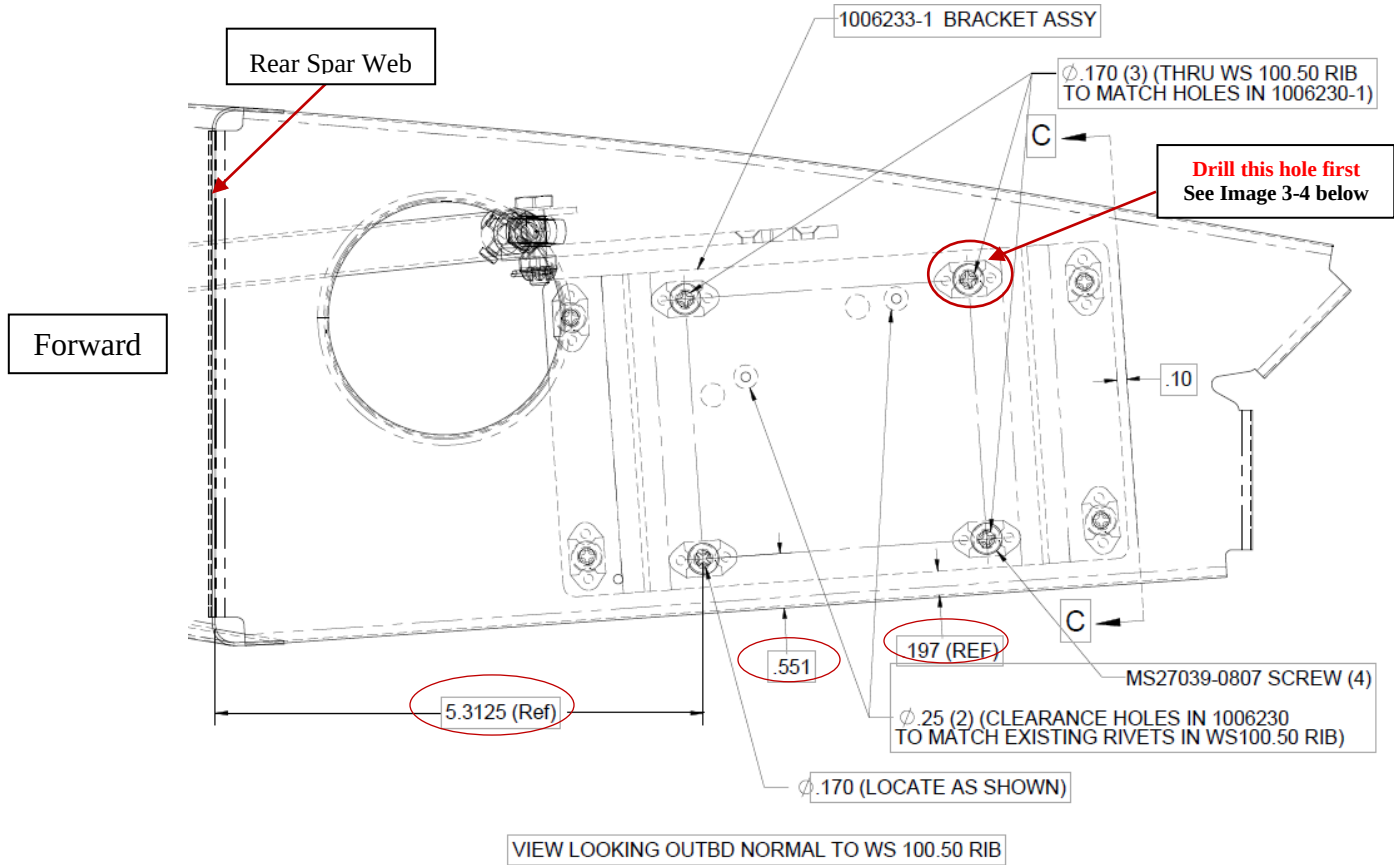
ROLL SERVO & MOUNTING PLATE INSTALLATION
